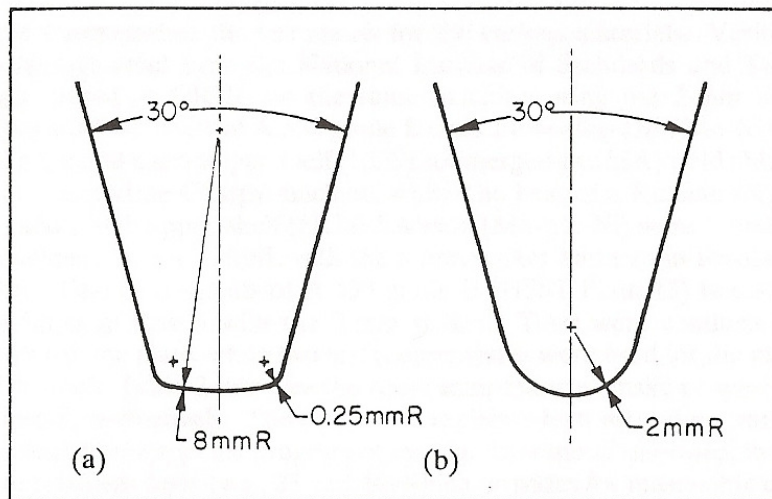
Schematic drawing of the (a) ASTM (8 mm radius) and (b) ISO (2 mm radius) striker.
